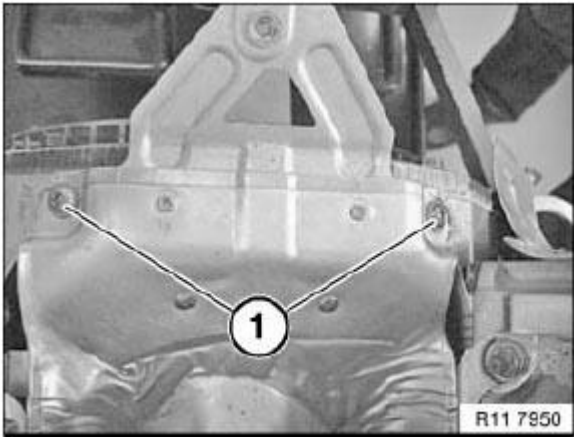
Identifying Bottom Heat Shield Screws (3 Of 3)
